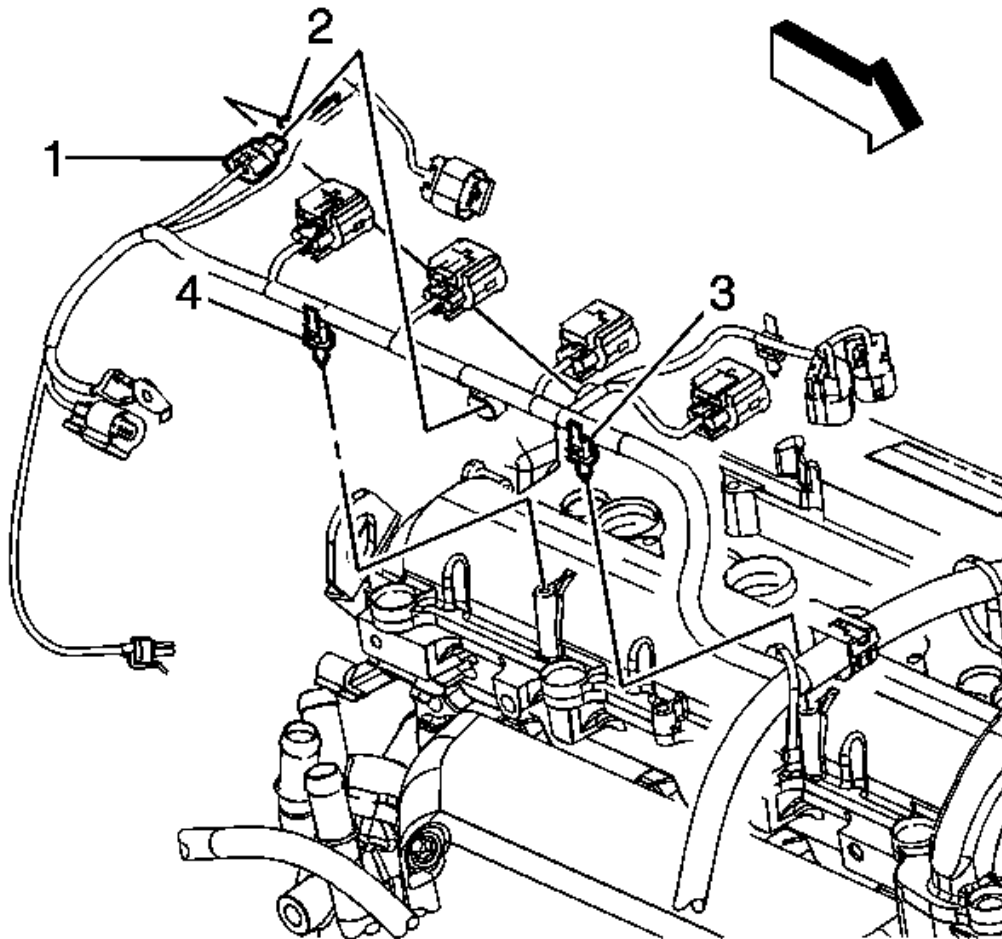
Locating EVAP Canister Purge Valve Electrical Connector & Harness Clips
